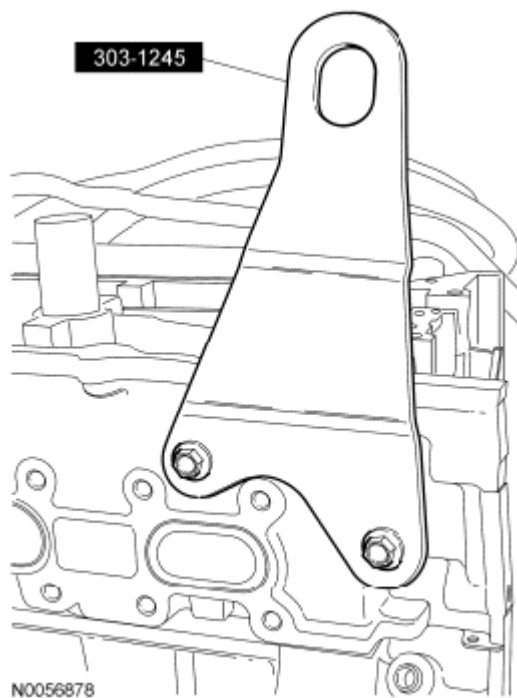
Locating Engine Lift Eye On LH Cylinder Head
